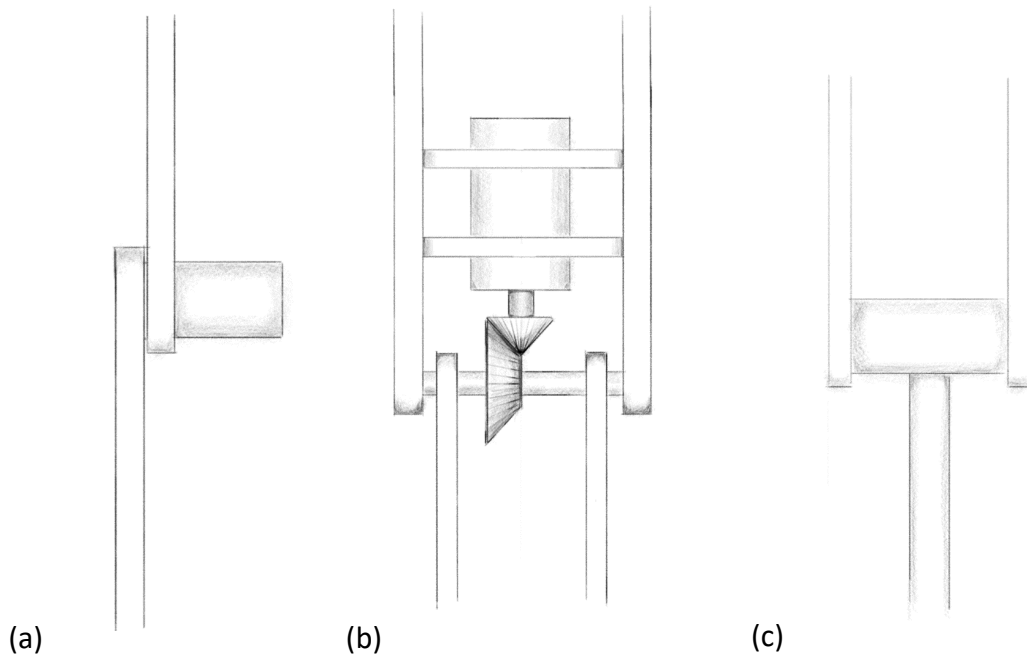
a) Concept (a) single bearing joint with overlapping links. b) Concept (b) dual bearing joint with motor at a right angle to the axis of rotation. c) Concept (c) dual bearing joint with inline motor drive.
